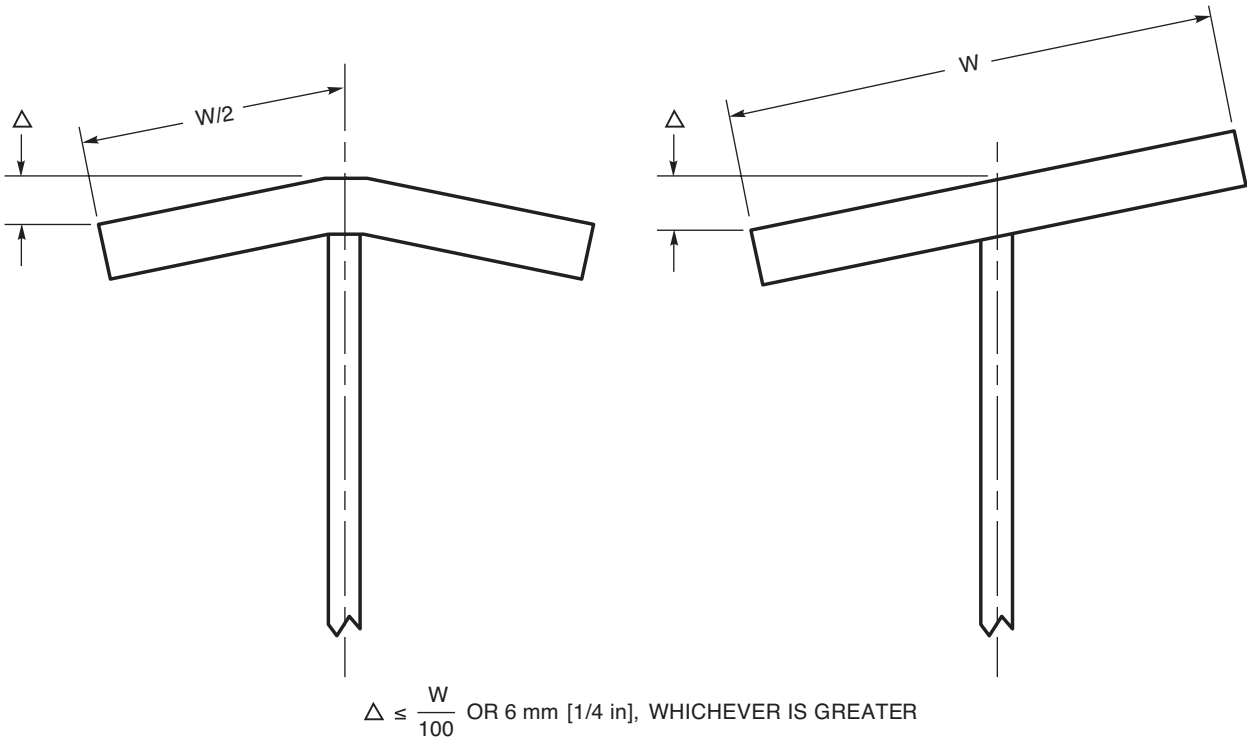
Measurement of Flange Warpage and Tilt (see C-5.5.7)
